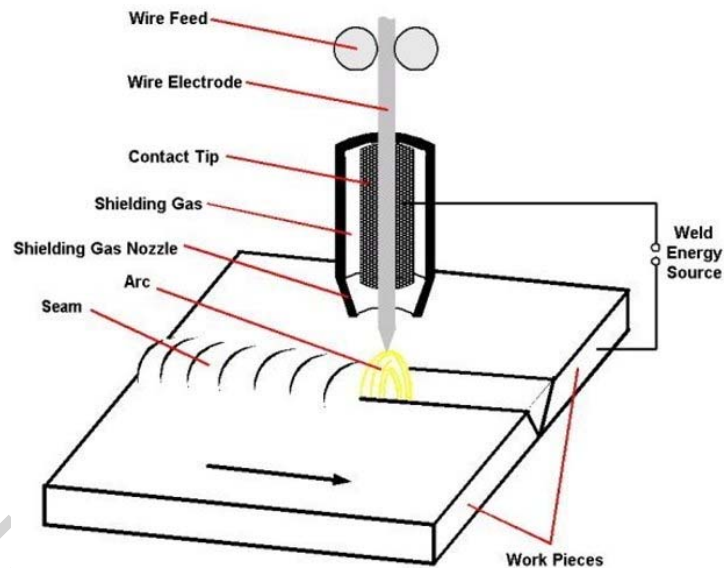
Gas Metal Arc Welding (schematic)
